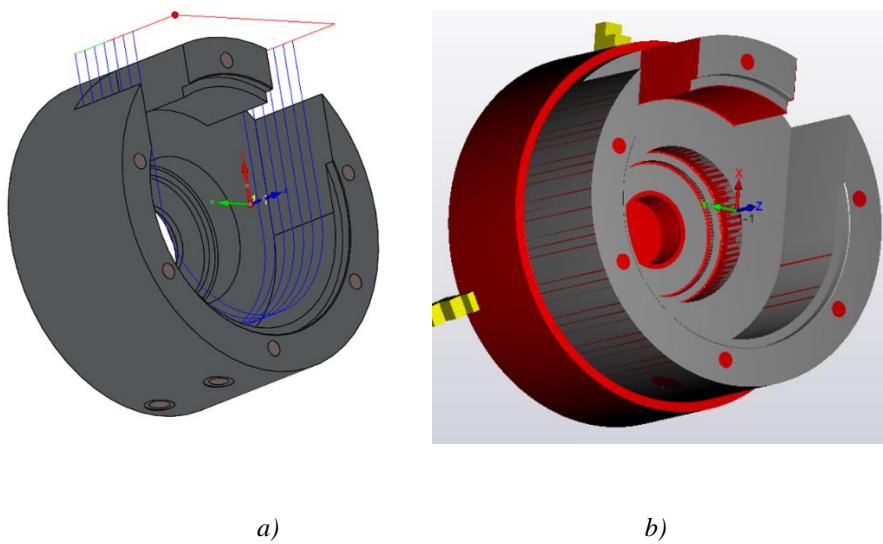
Toolpath of the tool in inside milling of inside side (a) Rest material after the inside milling of inside side(b)
